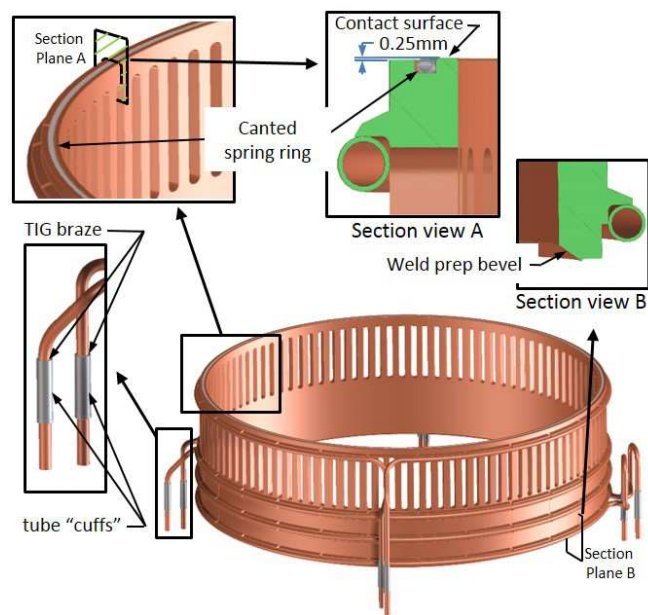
Cavity wall subassembly with section views of top and bottom profiles.
